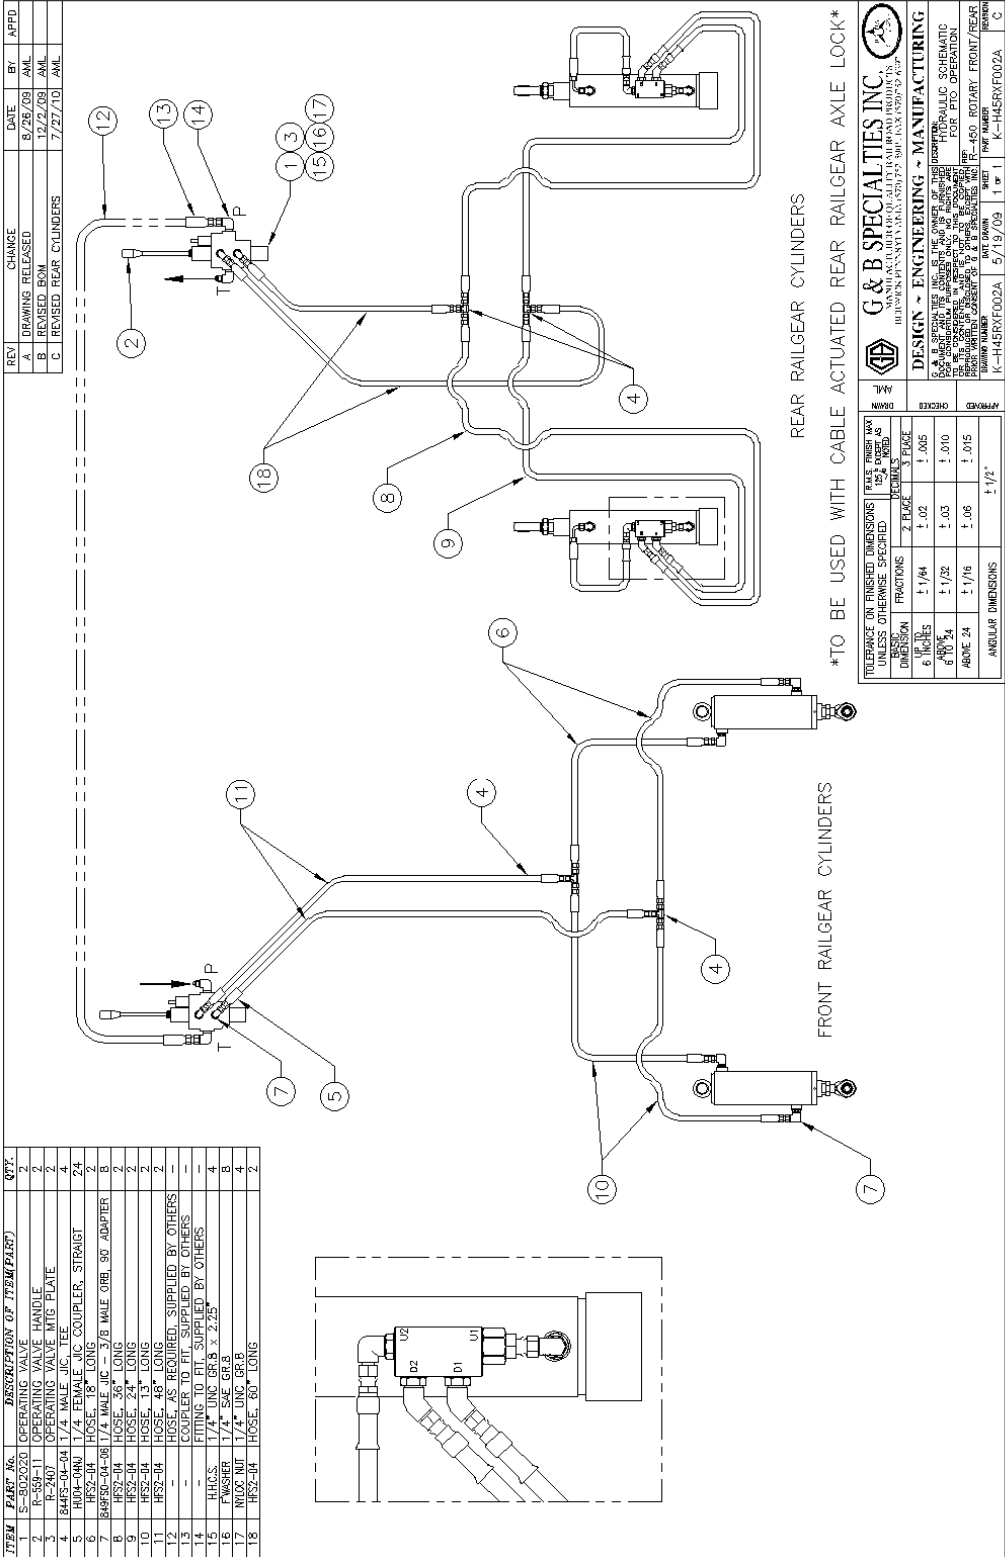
Rear Railgear Cable Axle Lockup (ref: Table 1)
